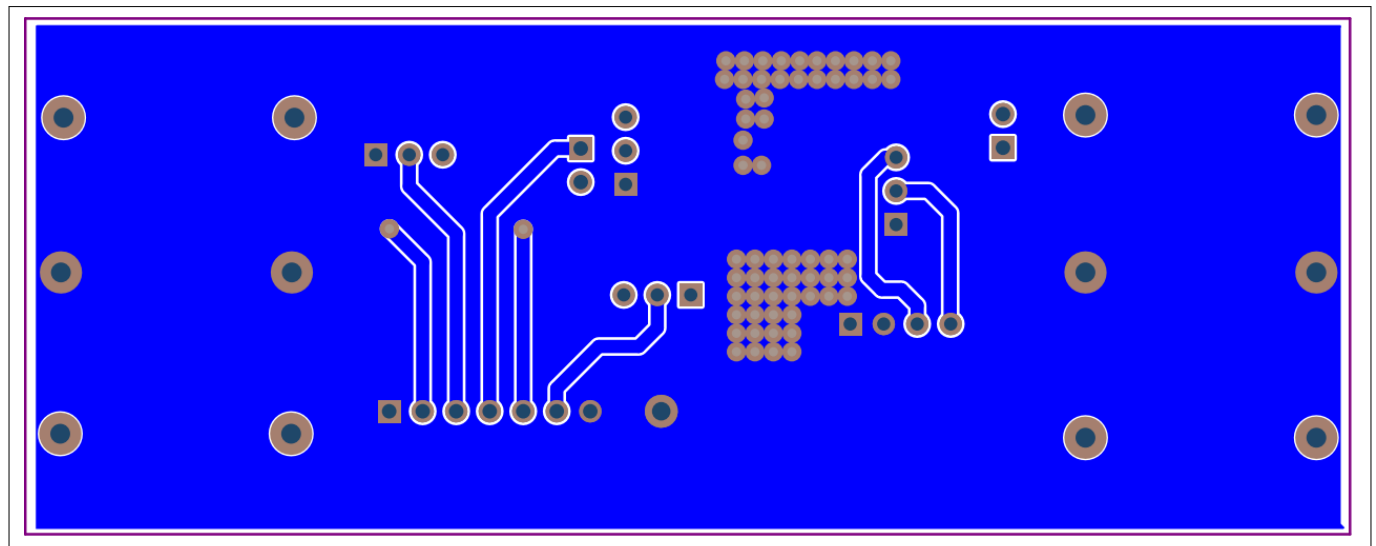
Bottom layer of TLS8xxx2ELVxx Demoboard
